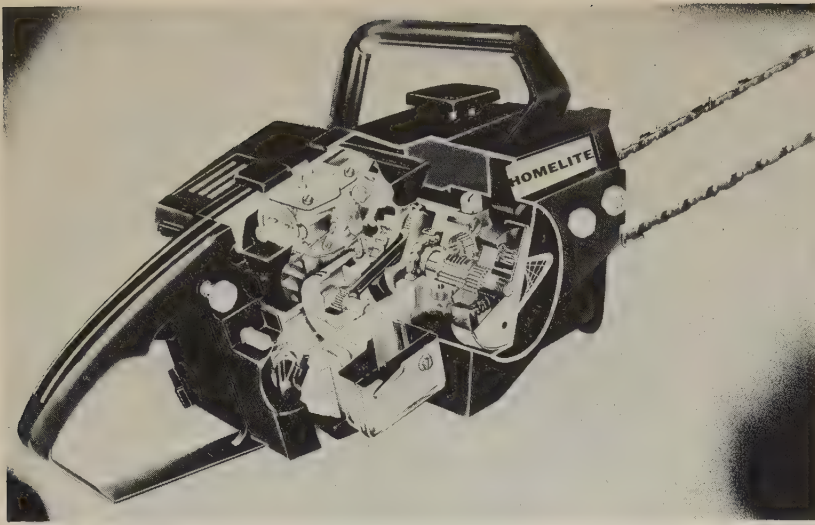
Cutaway view of a chain saw showing the internal construction of the engine. (Homelite Division of Textron, Inc.)
